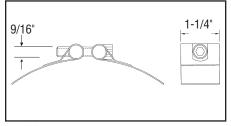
Wide Barrel — 1-1/4" Wide Barrel Assembly Welded to Sheath with 5/16-18 Socket Head Screw
